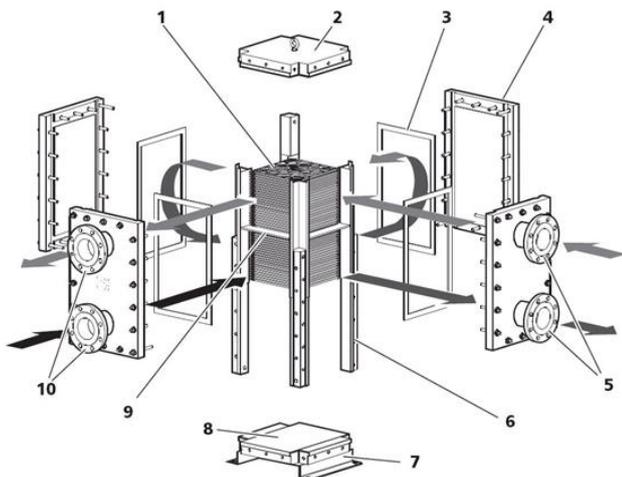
GEABloc welded plate heat exchanger reboiler. 1 Plate pack, 2 Top head, 3 Panel gasket, 4 Panel, 5 Primary side connection, 6 Column, 7 Support, 8 Bottom head, 9 Baffle/guide plate, 10 Secondary side connection. (GEA Ecoflex GmbH)
